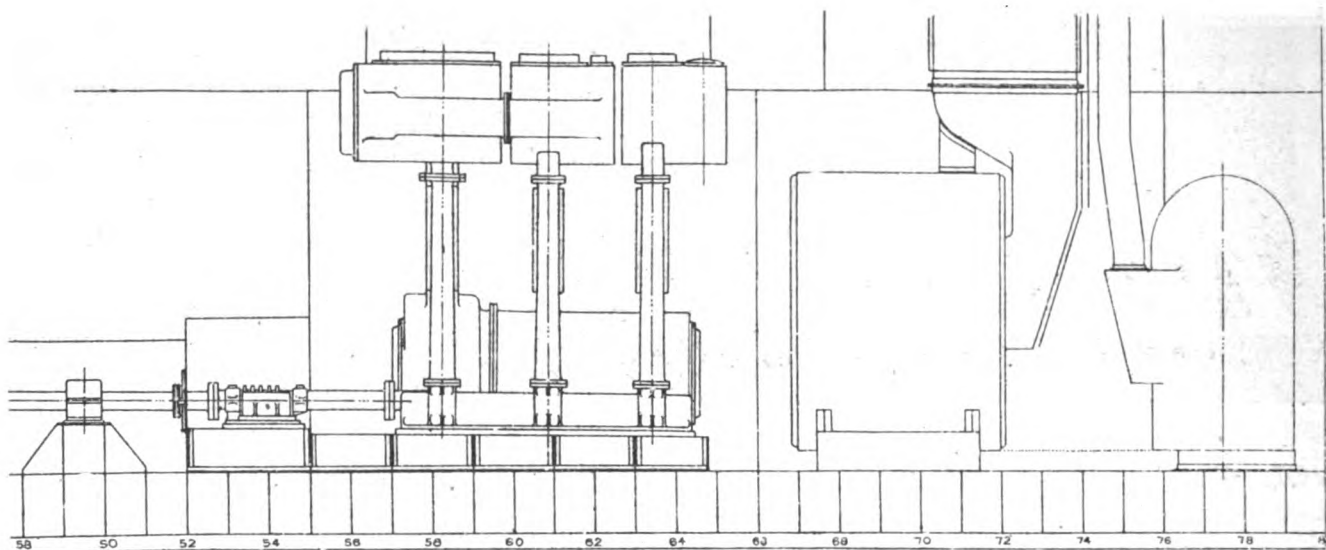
LONGITUDINAL SECTION OF VESPASIAN THROUGH ENGINE AND BOILER ROOM, SHOWING RECIPROCATING ENGINES.
